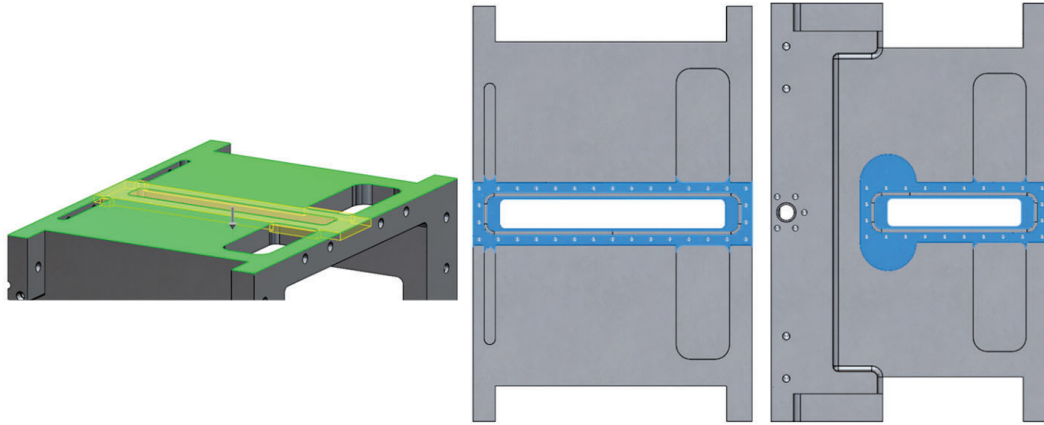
A rectangular area on the top surface of the cooling chamber is cut away to provide a clean, machined surface for mounting the recycle ductwork, rather than relying on the cast surface for sealing. On units with door features, an arbitrarily large diameter semi-circular area is added to ensure the full rectangular area for the ductwork can be machined without specifying specific tooling to a manufacturer.
